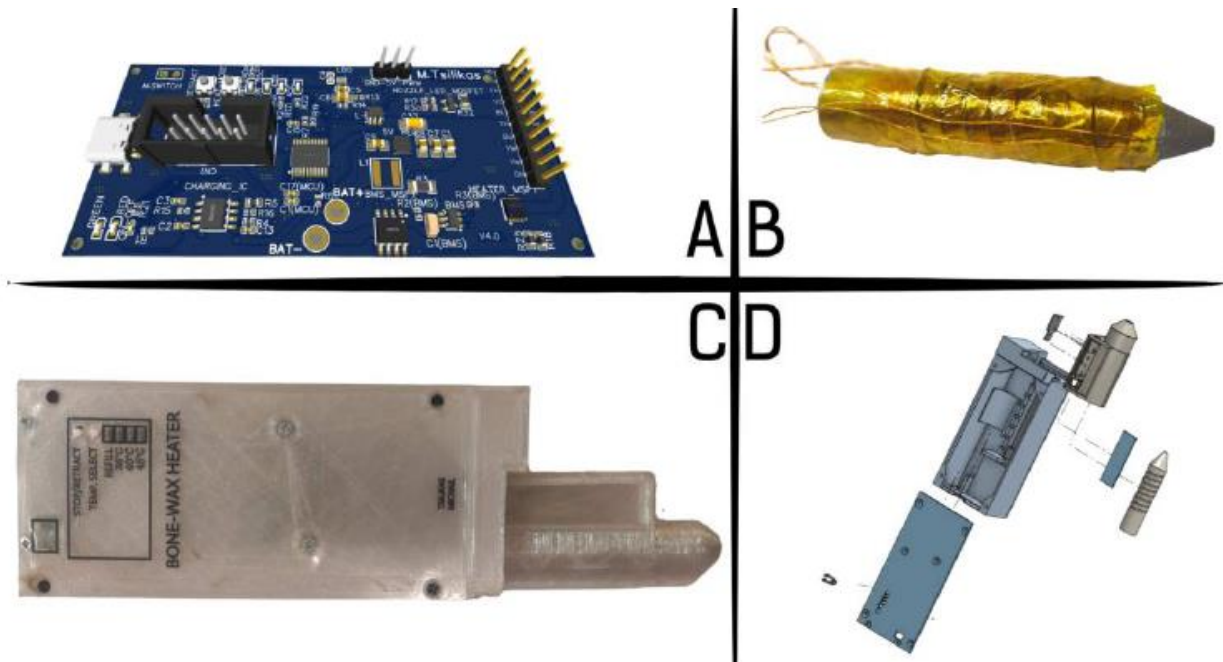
A. 3D Preview of PCB B. Heating Chamber C. The Final Device D. 3D Preview of Device's Parts
